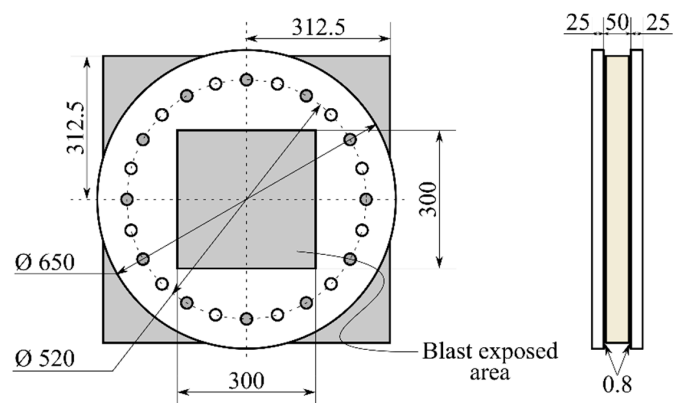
Sketch of the test specimen and clamping frame. All dimensions in mm.
